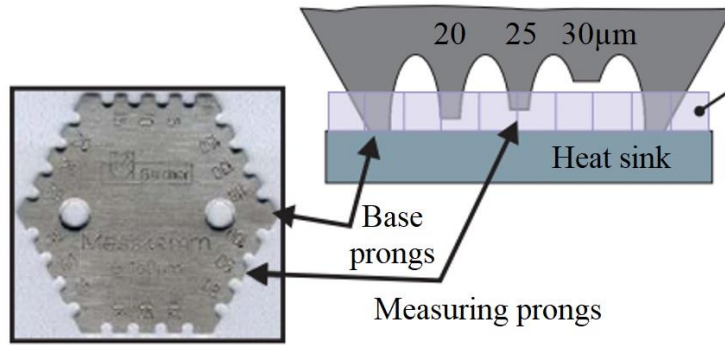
Comb Type Mechanical Thickness Gauge [6]
